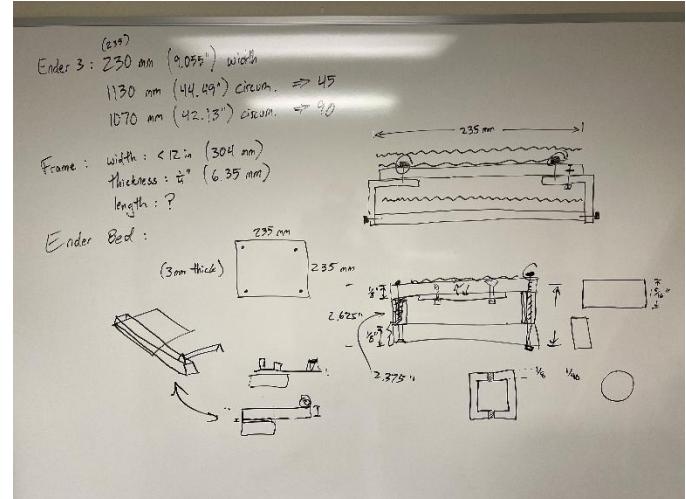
Figure B. Whiteboard from the preliminary design phase containing manufacturer-specified dimensions for several conveyor belts in consideration for purchase (upper left) as well as design ideas for the cross-sectional arrangement of the assembly.
